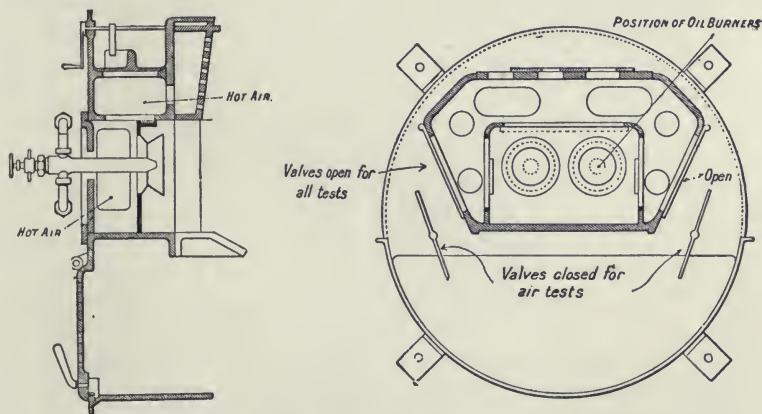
ELLIS AND EAVES SYSTEM, FURNACE DOOR ARRANGEMENT.
